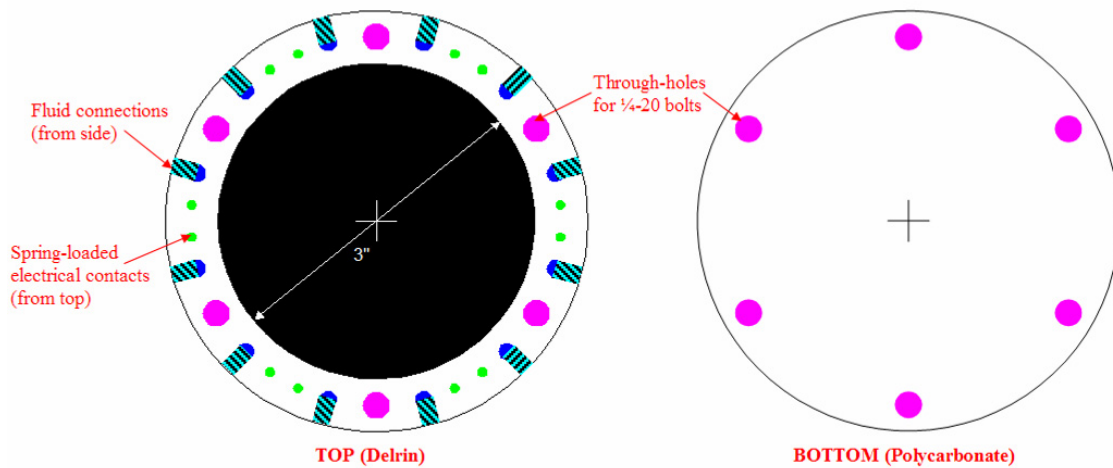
Schematic views of the top ring and bottom plate for the ring packaging fixture.
